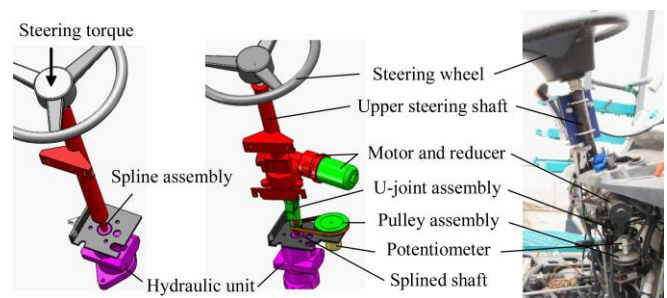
Layout and installation of principal components of the automatic steering mechanism
